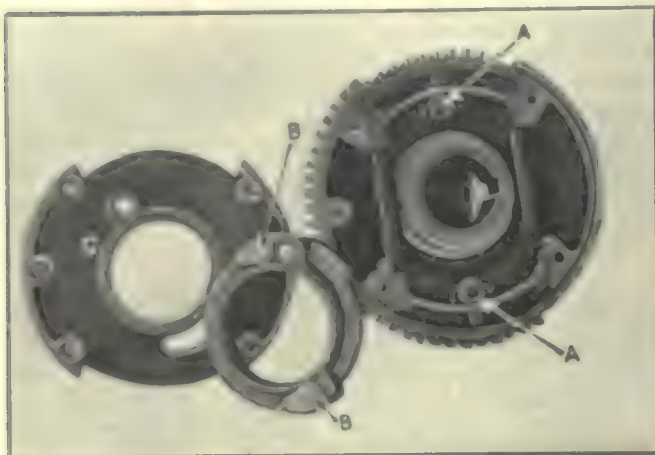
THE GEAR PARTLY DISASSEMBLED
